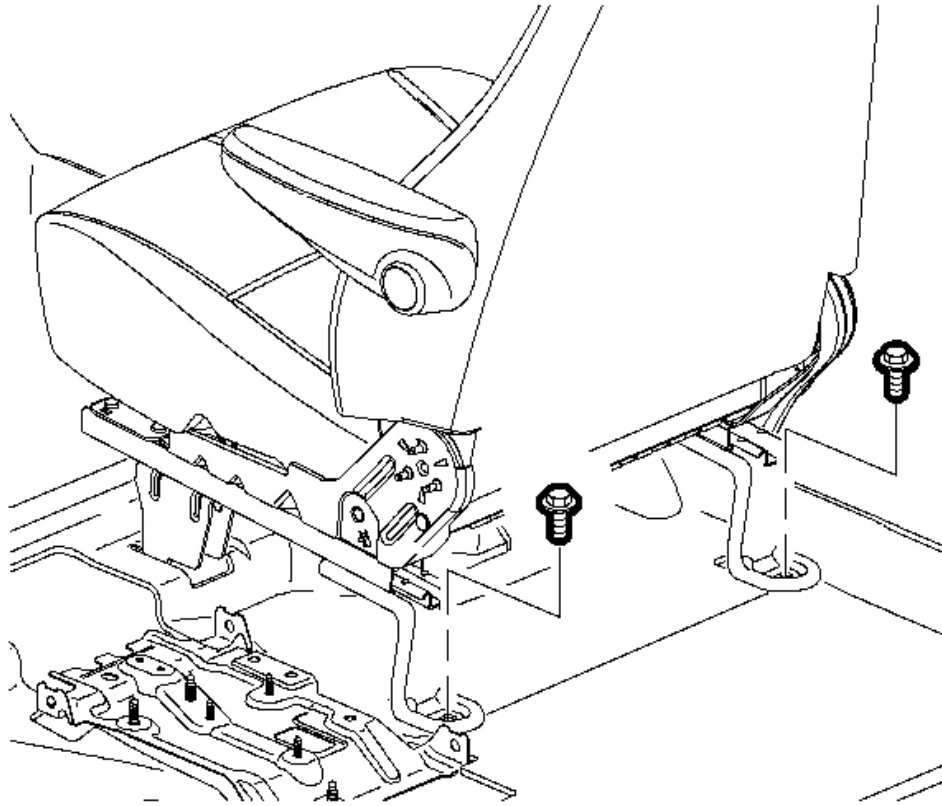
Removing/Installing Front Seat Adjuster Bolts
